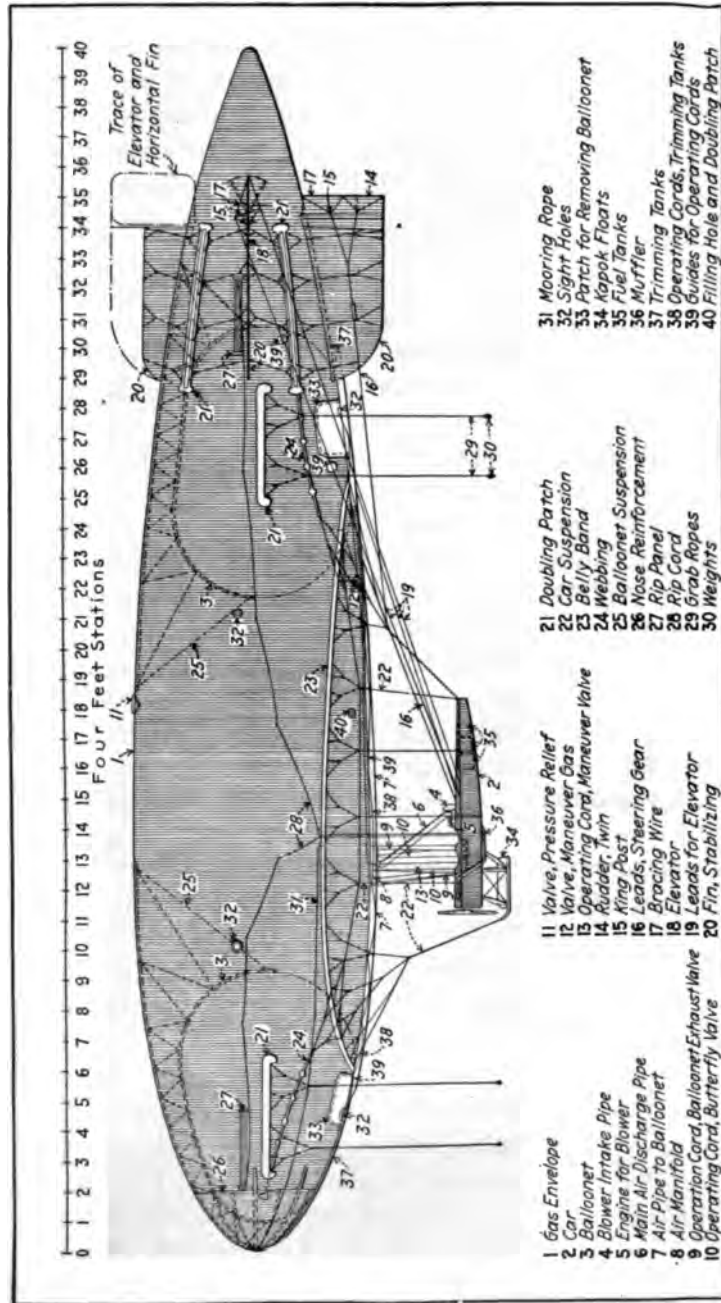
General Arrangement Plan for New Navy "Blimps."
